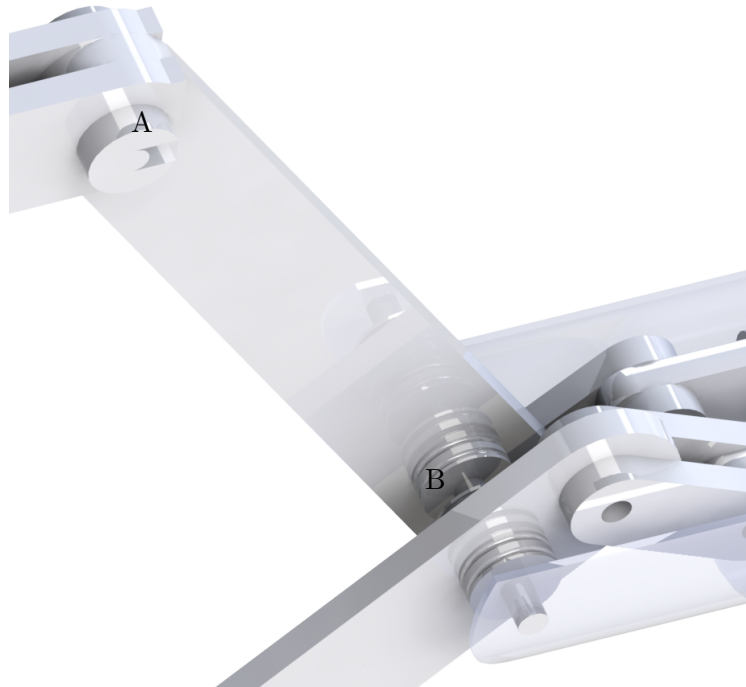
Close up view of rollers and jaws. Cables, not shown, would connect to the jaw at location 'A' and run through rollers at 'B'.
